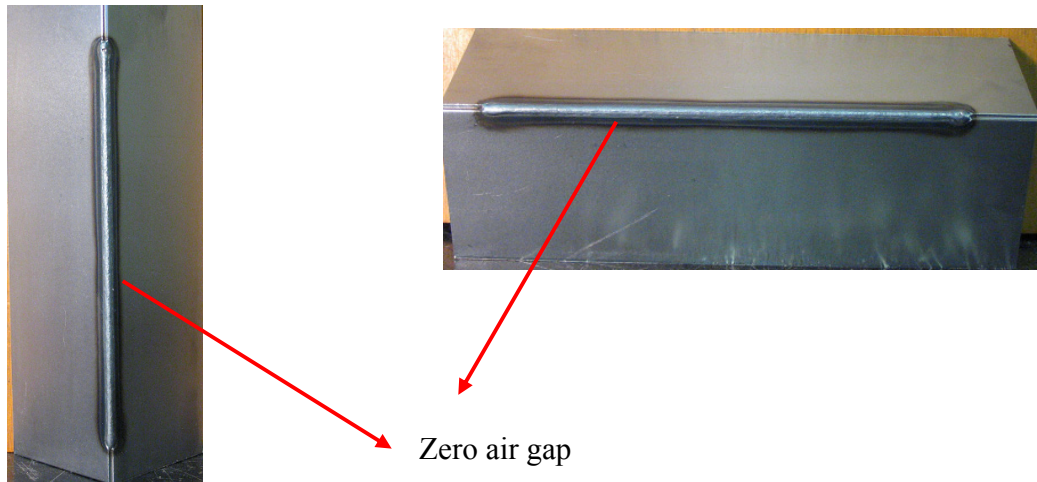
Show the set-up of welding of zero air gap with MAG-P.
